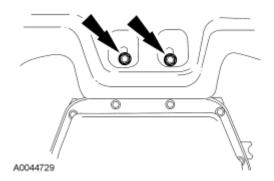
Rear Transmission Insulator Nuts Courtesy of FORD MOTOR CO.
